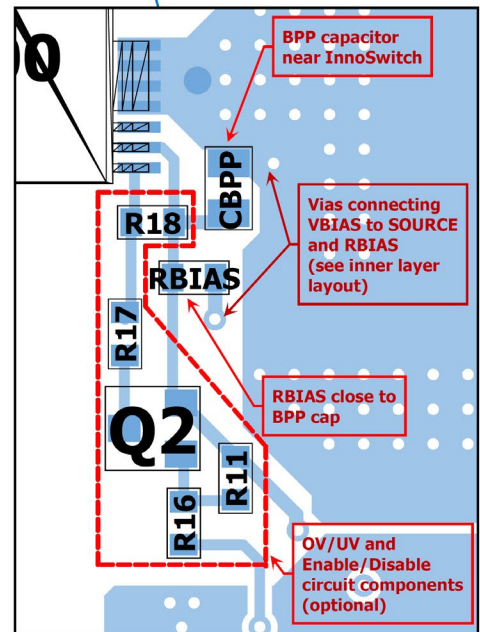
Layout Example Showing Implementation of Suggested Placement and Routing Guidelines. This Layout has Components on Both the Top and Bottom Layers (Top Assembly of DER-953Q).
